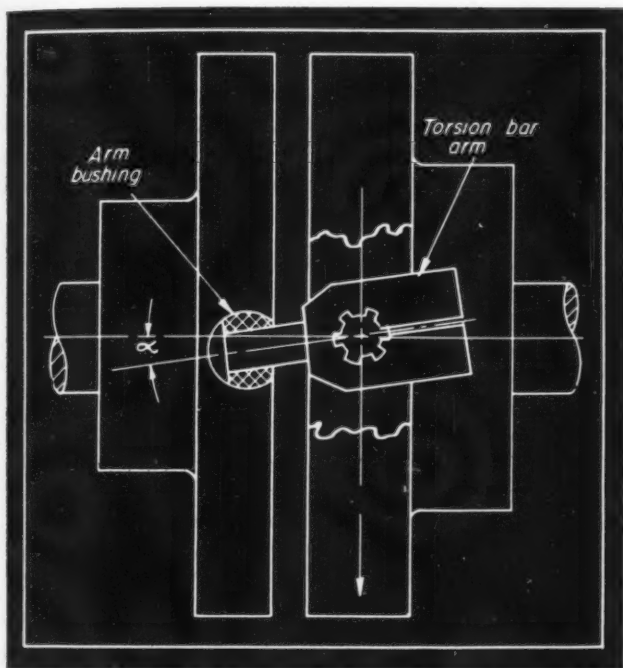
Coupling is designed so that angle α becomes zero when the rated torque is being transmitted
